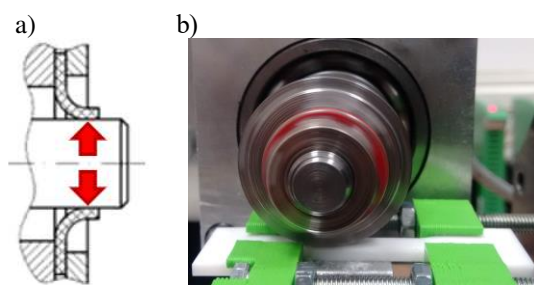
a) Deformed shaft lip seal; b) Sample held in grip during the wear test
